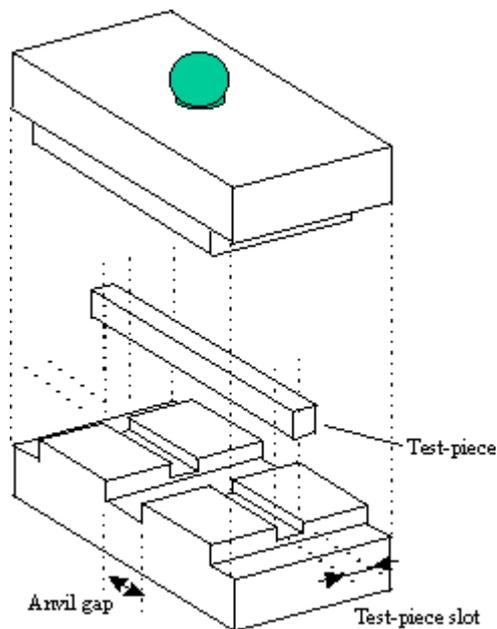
Example of a pre-cracking jig for the SEPB method
